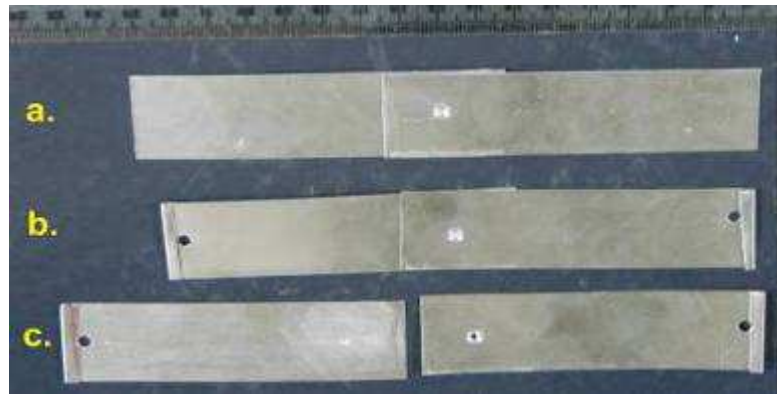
, Specimen (a) after welding, (b)(c) before and after shear test
